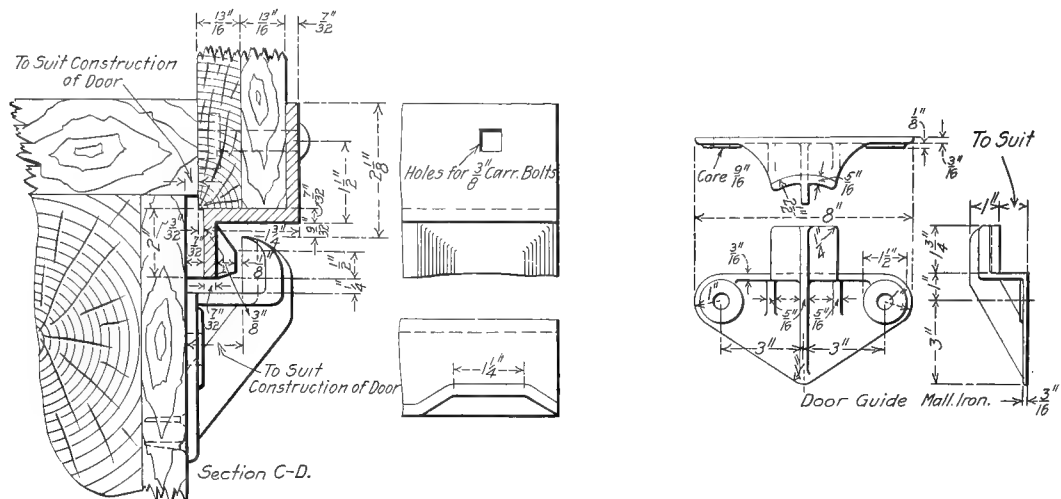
Details for M. C. B. Standard Outside Hung Box Car Side Door. (M. C. B. Sheet 30.) See also Fig. 2896.
